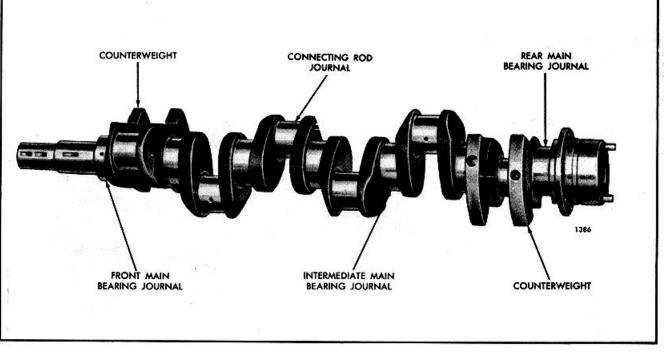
Typical Six Cylinder Crankshaft (Former)
